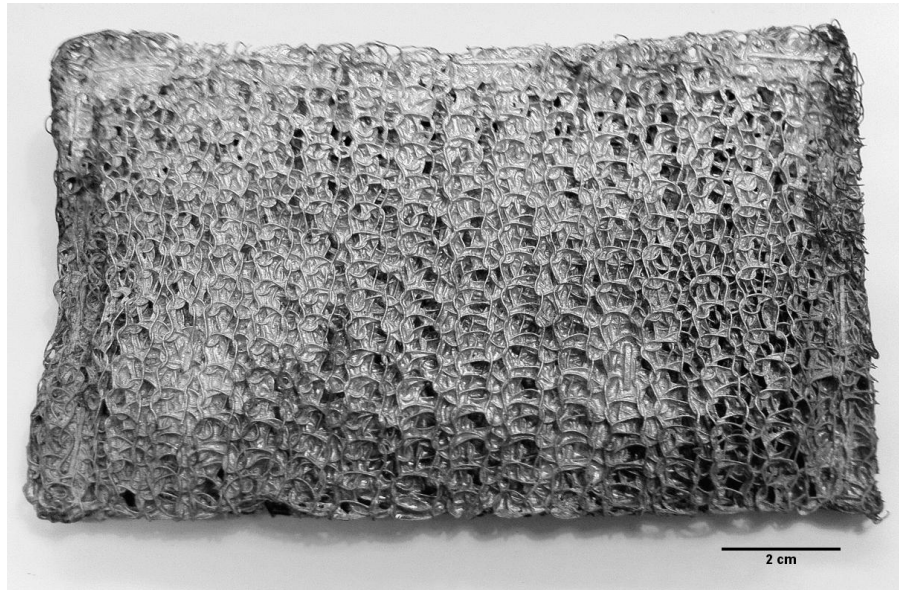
mesh filter removed after casting of AZ80 alloy, upstream face visible.
